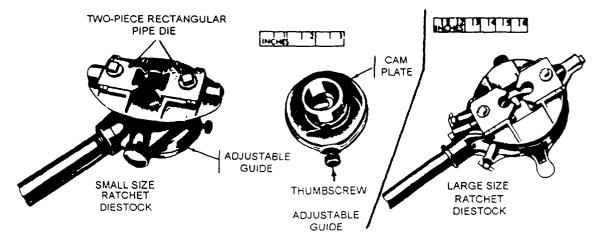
Adjustable die guide and ratchet diestocks.
